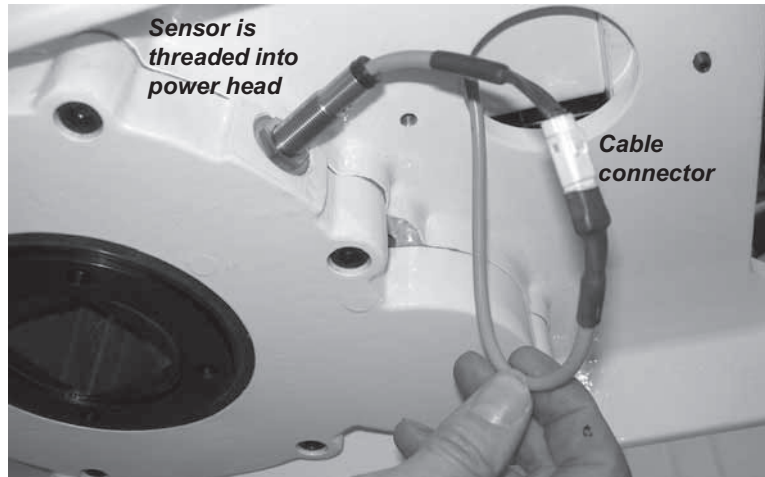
Remove the proximity sensor and disconnect the cable.
